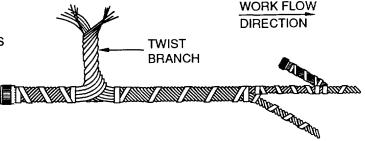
Cable/Harness Fabrication Twisting (Sheet 2)
